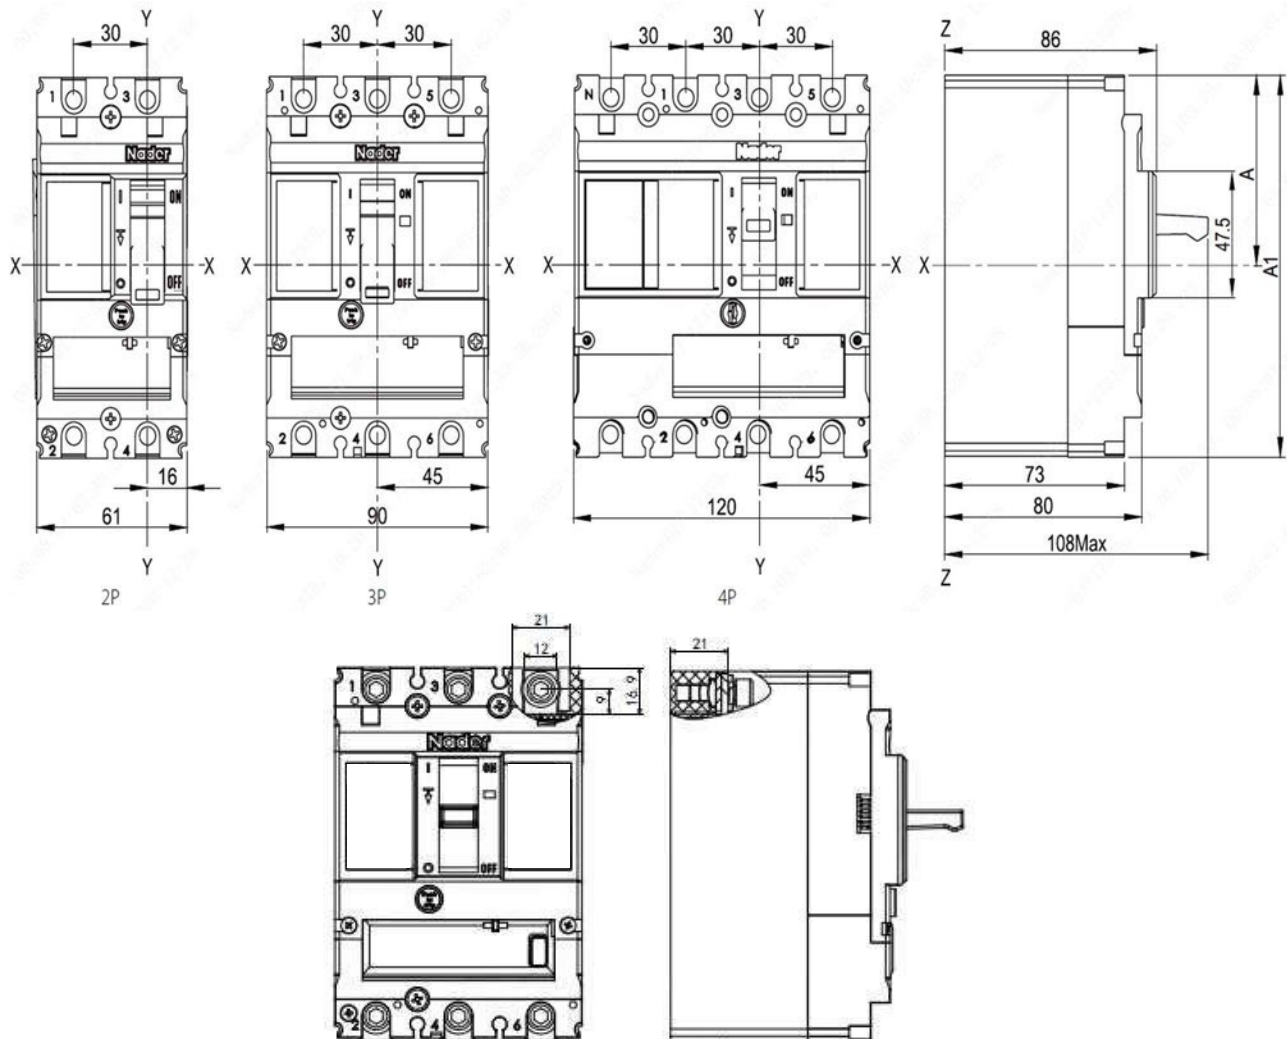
2P、3P、4P Overall dimensions of front board wiring products
